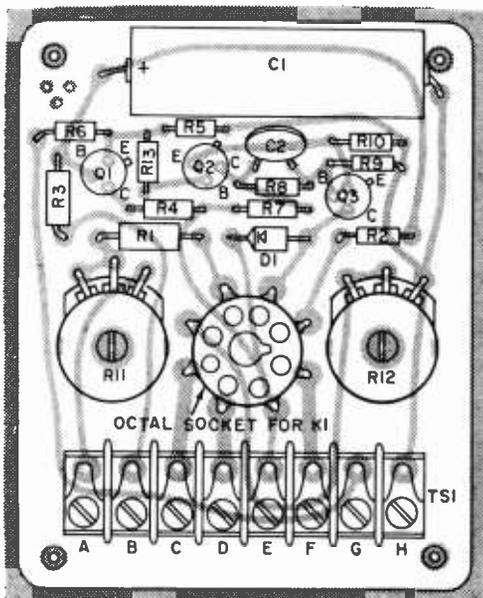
If you make or buy a printed circuit board the components should be positioned as shown. The 3 spare holes in the corner mount a socket to hold Q1 when this transistor is not in the circuit.
